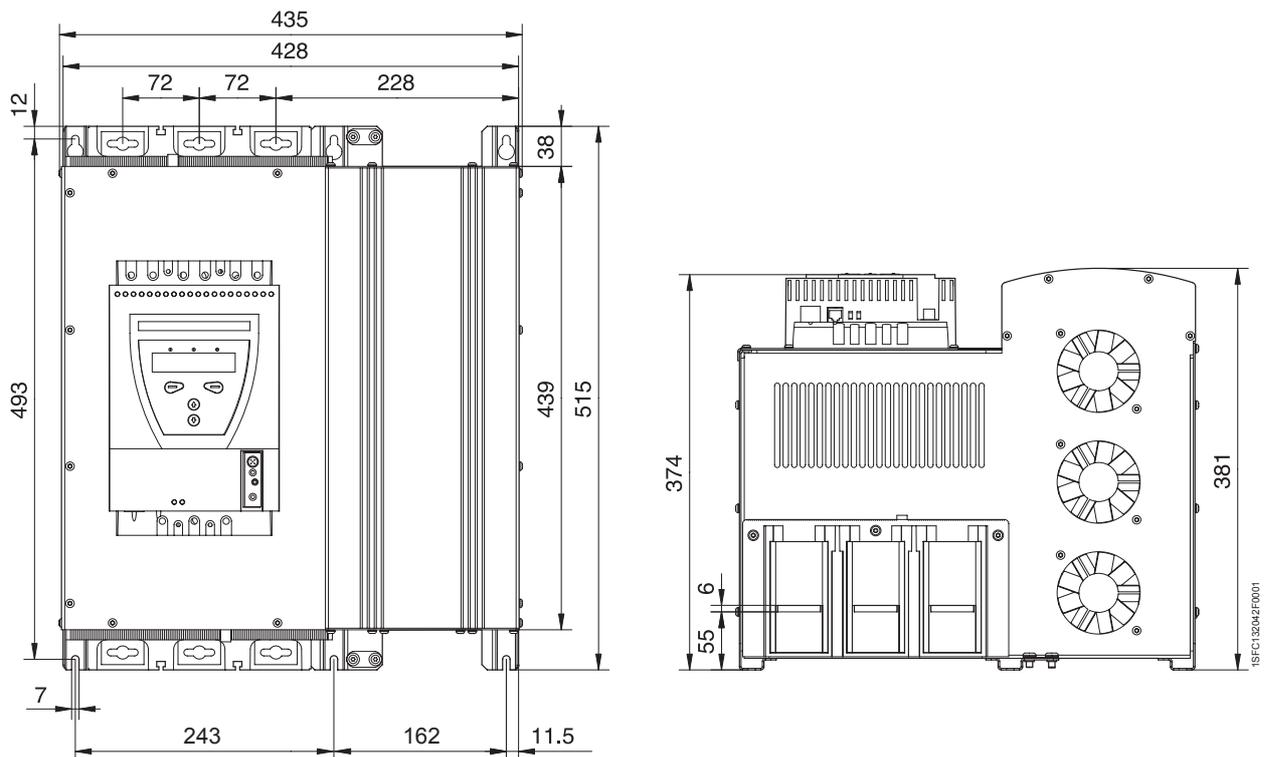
Dimensions PSTB570...1050 (mm) (1 mm = 0.0394 in)
